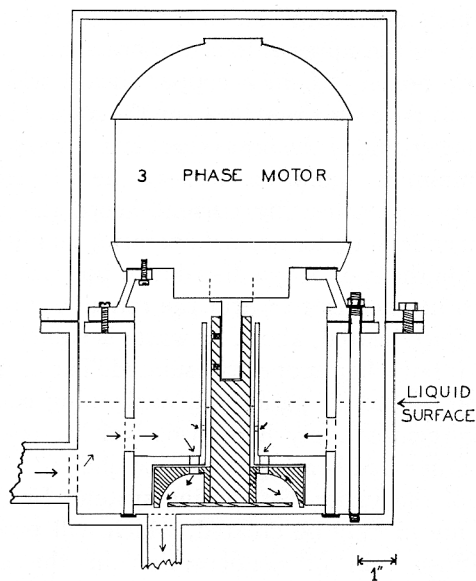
Centrifugal pump. Rotor, shown cross-hatched, is entirely supported by motor shaft bearings. The interior of the rotor contains a diaphragm to assure rotation of contained liquid.
